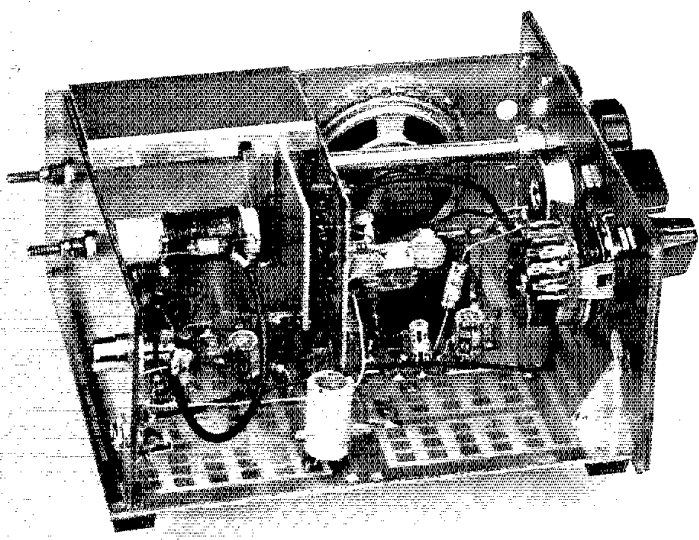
Interior view of the assembled receiver with one side panel removed. C1 is located inside the VFBO compartment, as is L4. A press-fit metal cover (see text) encloses the top of the VFBO compartment during operation. Miniature RG-174/U coax cable is used between L1 and J1. It is used also between R2 and the input to U1. Be sure to ground the shield braid at each end of each cable. Miniature shielded audio cable can be used in place of the RG-174/U.
